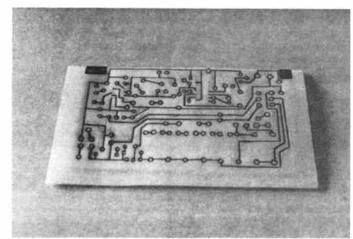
The tracing of the PCB pattern fixed to the copper clad board
